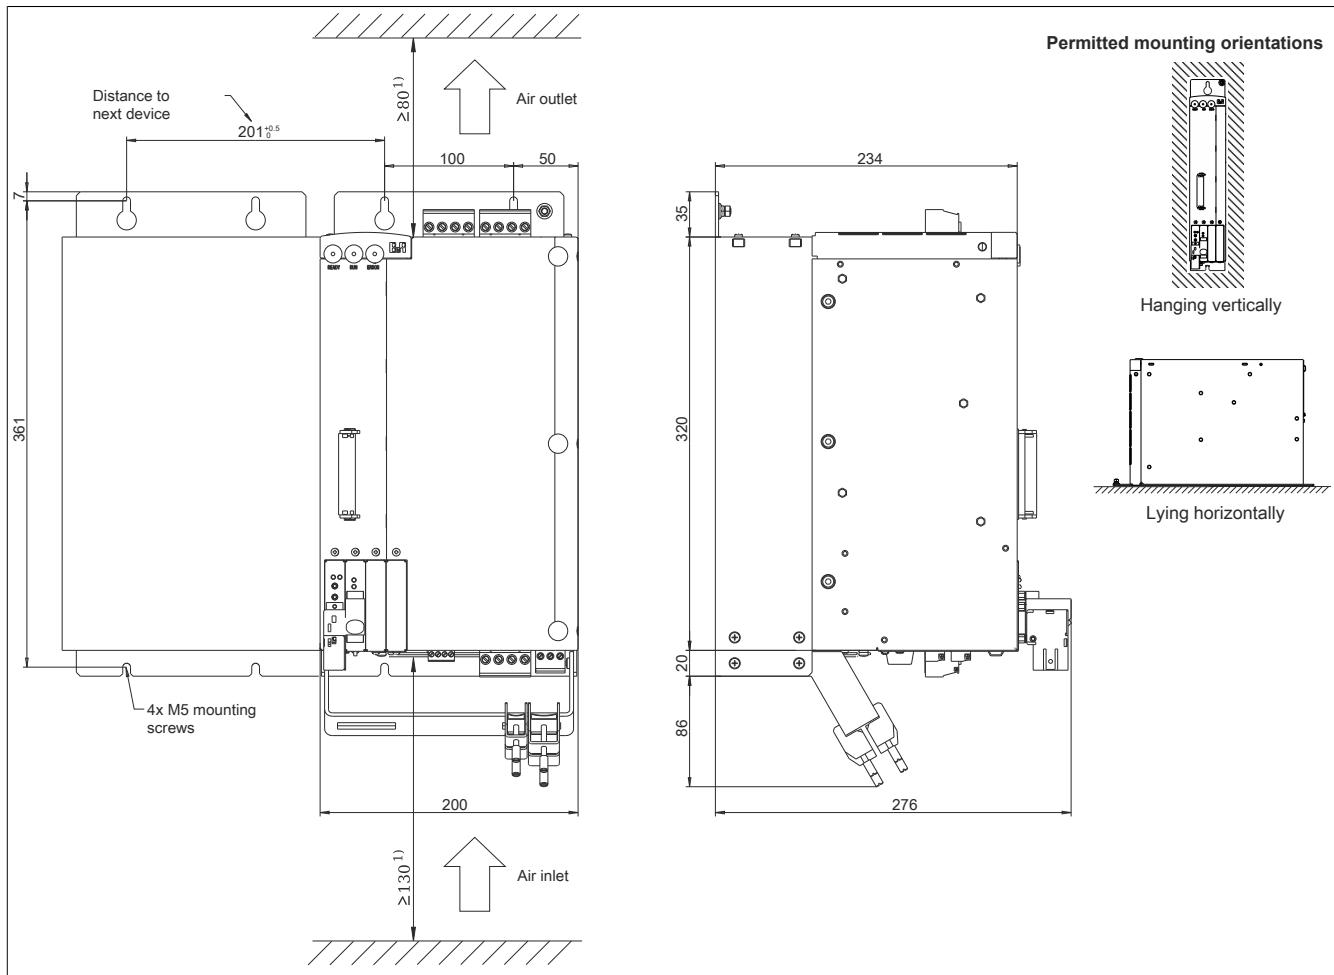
ACOPOS 1180, 1320 - Dimension diagram and installation dimensions
